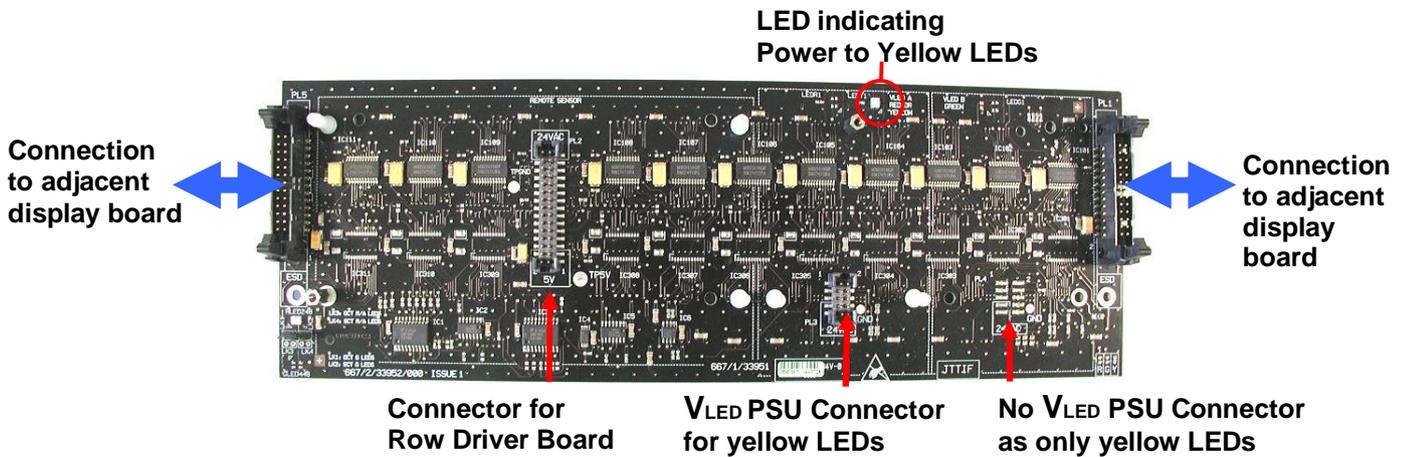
100mm Character PCB Assembly (Yellow) – Viewed from rear
